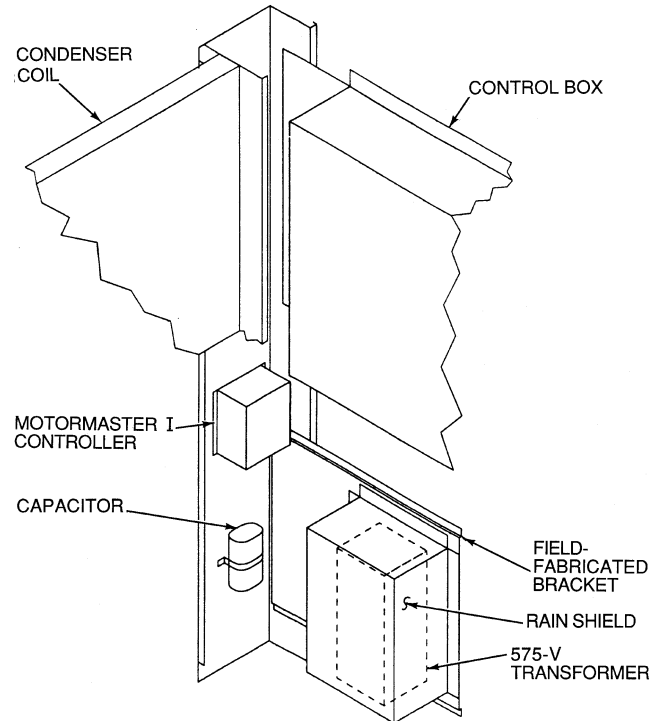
Mounting Motormaster I Controller, Capacitor, and 575-V Transformer; 48/50DJ,DK and 50DW,DY034,044 Units
